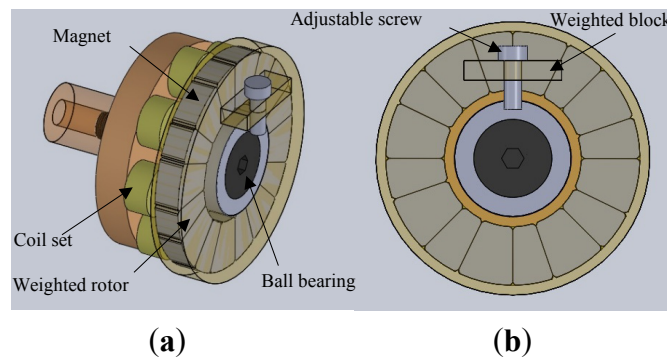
Schematic diagram of WREH. (a) 3D schematic view of the WREH for TPMS. (b) Weighted rotor composed of magnets, a weighted block, and an adjustable screw.
